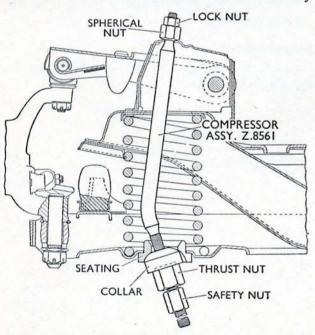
Operating position of spring compressor. The compressor screw must be positioned as shown
